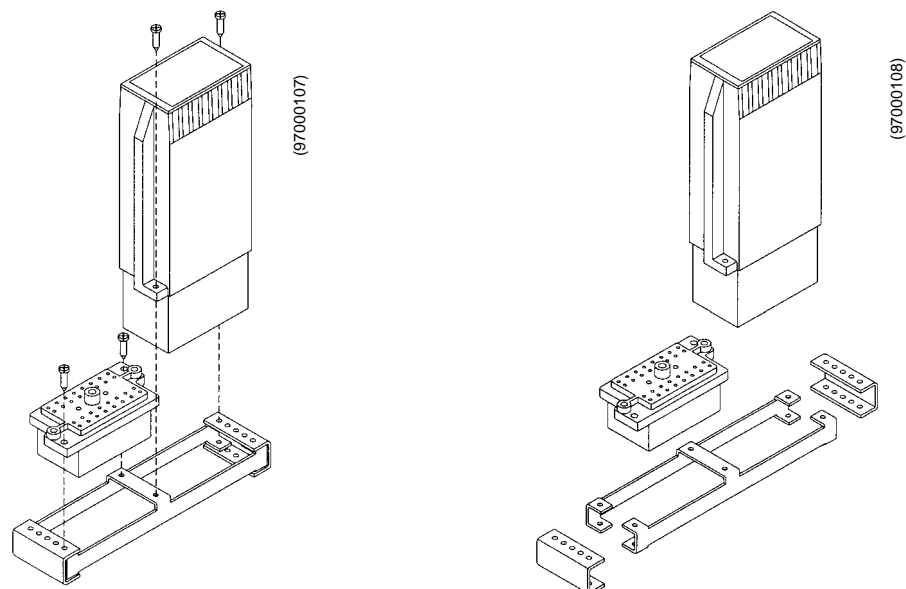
The assembly of RTXP 8 and terminal base RX 1 with the 4U adapter.
